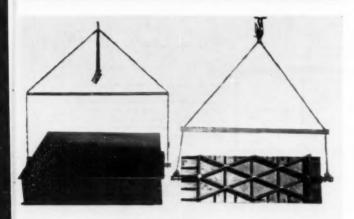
The welded steel plate showed an improvement of 358 per cent over the cast-iron design. Two usable surfaces were provided — one for rough checking and one for finish checking.
